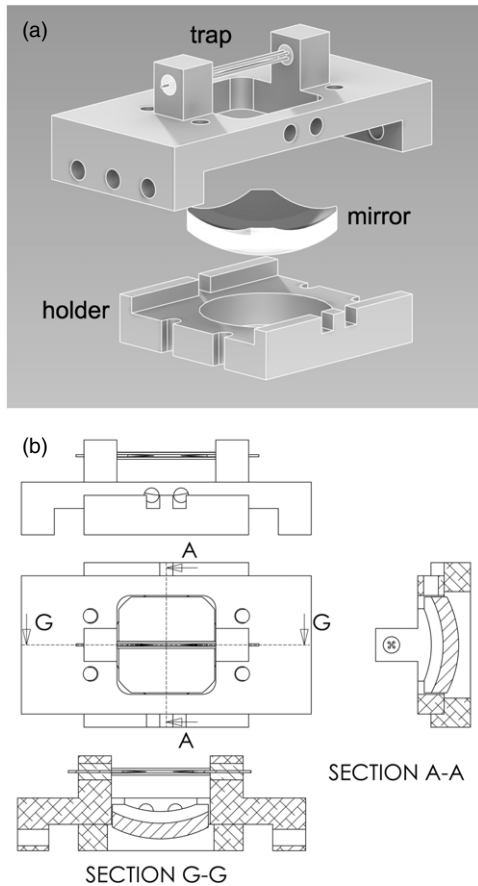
Linear ion trap with integrated spherical mirror. (a) An exploded view of the assembly setup. The mirror holder allows precision positioning of the mirror with respect to the trap. (b) Technical drawing showing the details of the assembly. Dimensions are available upon request.
